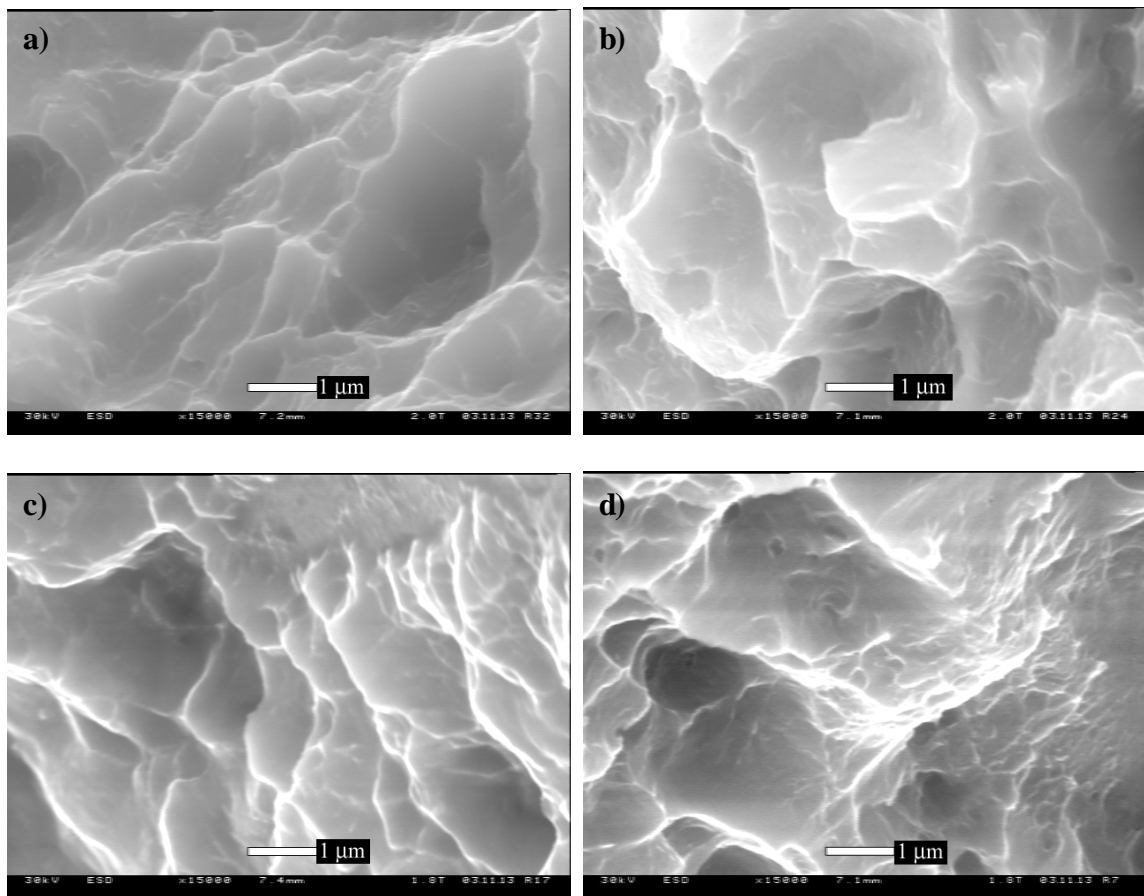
Fracture surfaces of tensile specimens, 15,000x. (a) Base metal, (b) matching filler metal weld, (c) modified 50 ppm Y filler metal weld, and (d) modified 200 ppm Y metal.
